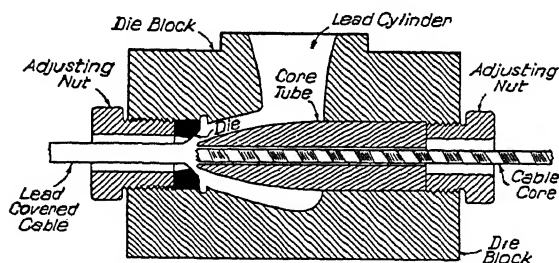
Die-block assembly used in extruding lead cable sheath.
